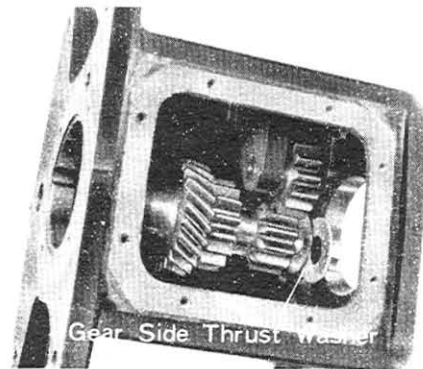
Counter Shaft Drive Gear & Thrust Washer Installation V0461
